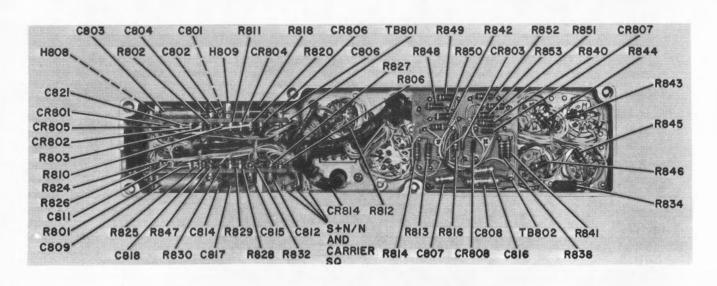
Audio Frequency Amplifier and Modulator Assembly, Bottom View
